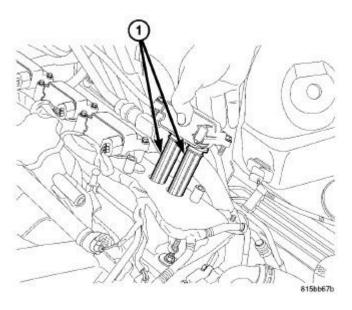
Removing/Installing Ignition Coil Courtesy of CHRYSLER LLC
